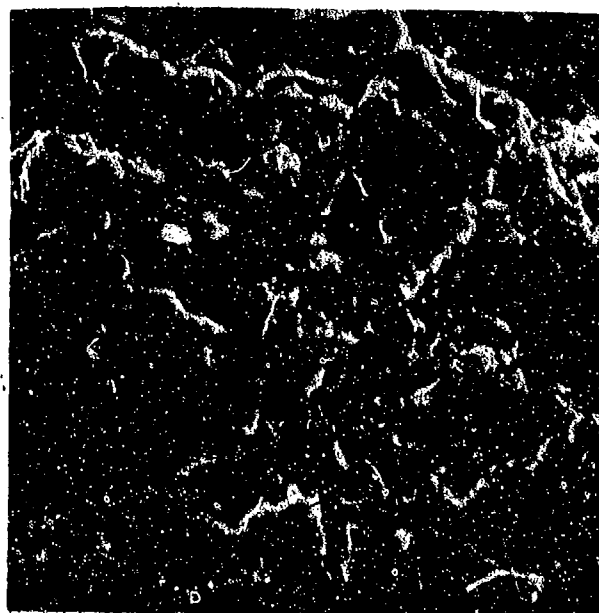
Fatigue cracks on fracture surface of AX-110 weld material, 4000x.
